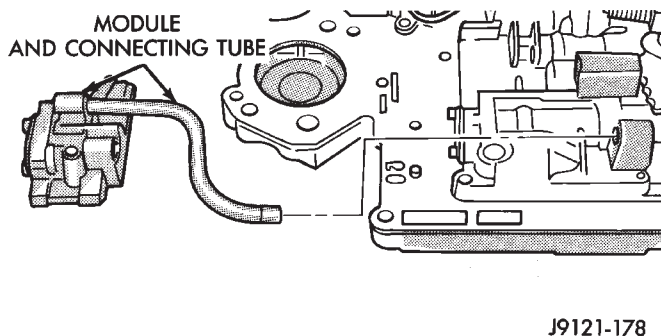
Clutch Module And Connecting Tube Removal/Installation
